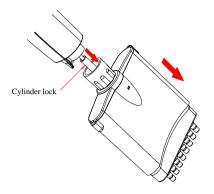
Pull the lower piston assembly downward slowly until the cylinder lock appears.
